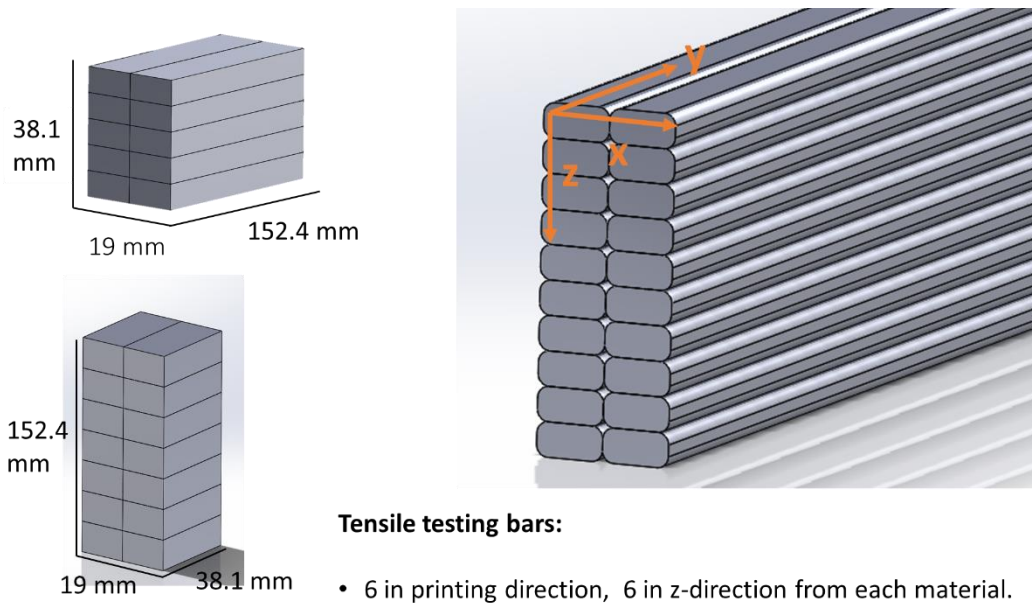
The tensile testing specimens that are cut from printed foam hexagon walls.
